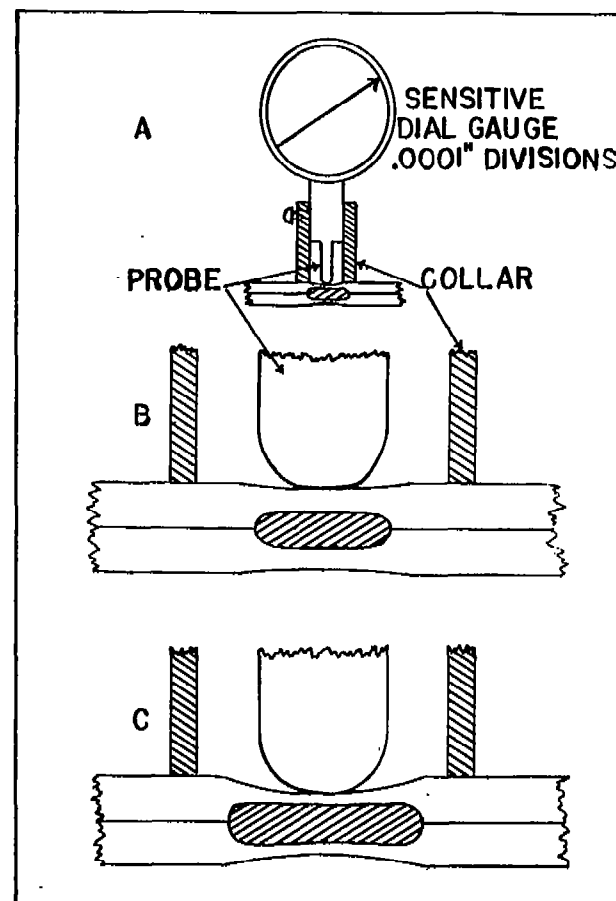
ELECTRODE INDENTATION OF WELDED SHEET TEST OF SPOTWELD SIZE, AND STRENGTH.
